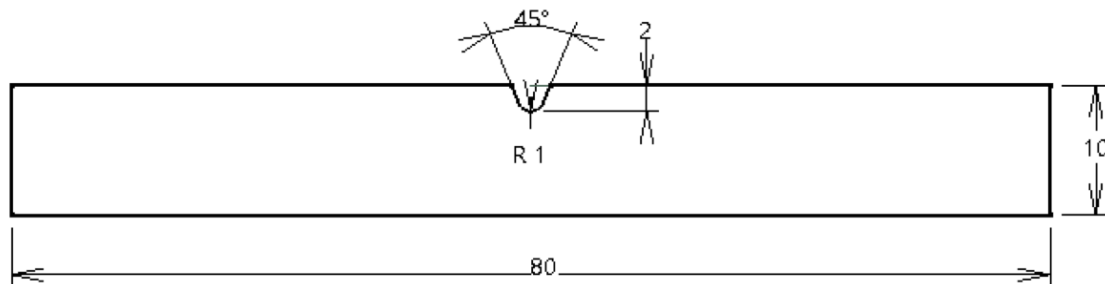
Dimensions of the Charpy impact test specimen. The units are in mm.
